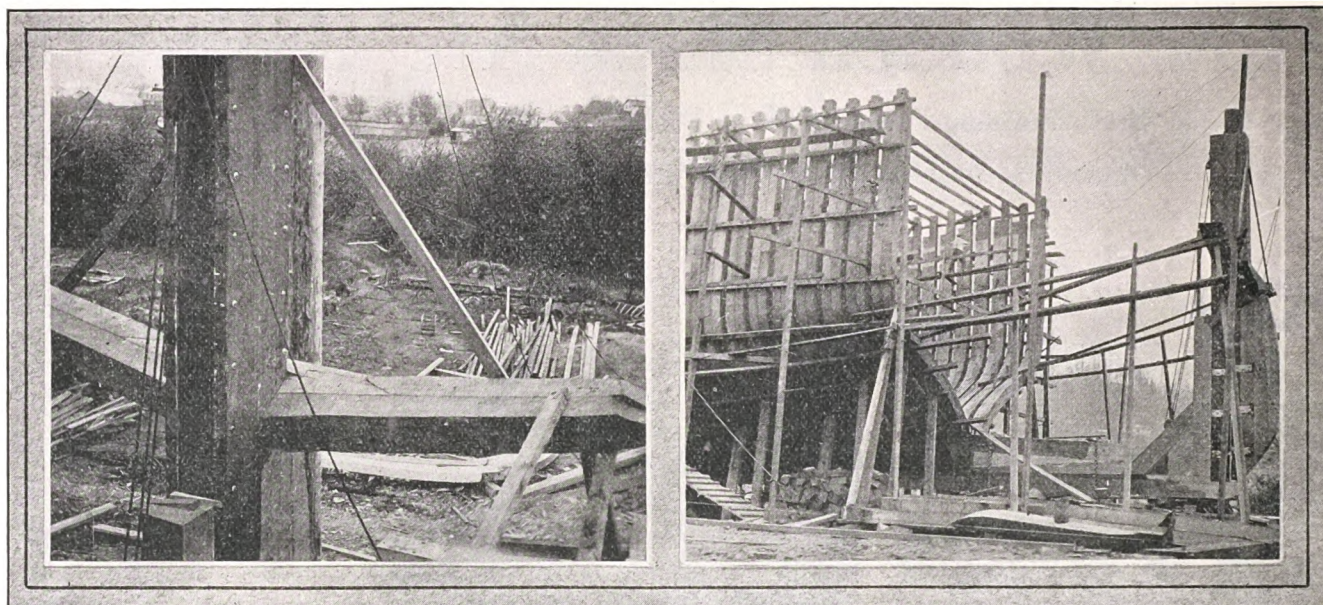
DETAIL OF UPPER PART OF STERN FRAMING SHOWN IN FIG. 102. FIG. 104—GENERAL VIEW OF STERN FRAMES AND RUDDER ASSEMBLY
